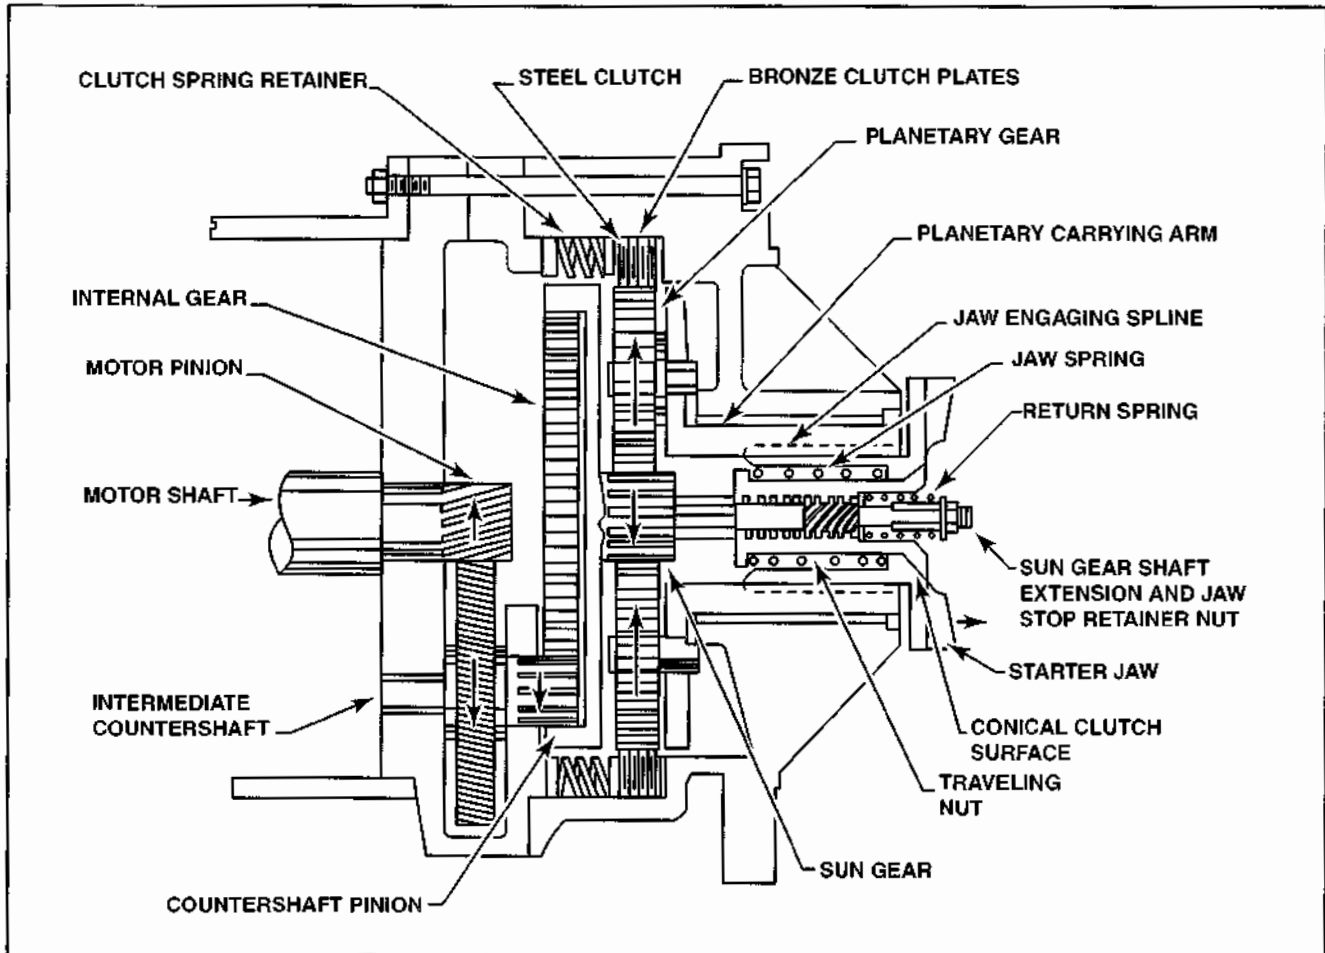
For a large reciprocating engine, the reduction gear train converts the high speed and low torque of a starting motor to the low speed and high torque necessary to start the engine. A pinion gear drives an intermediate countershaft assembly that turns the sun gear in a planetary gear reduction assembly, and the rotation of the planetary gears causes the starter jaw to engage the engine.
